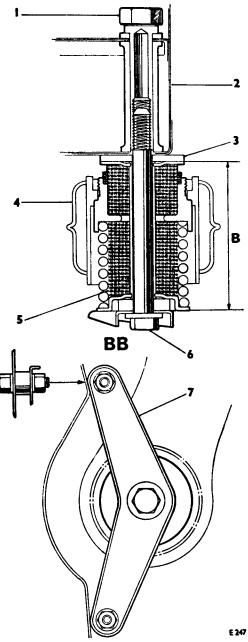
FRONT SUB-FRAME RESILIENT MOUNTS
